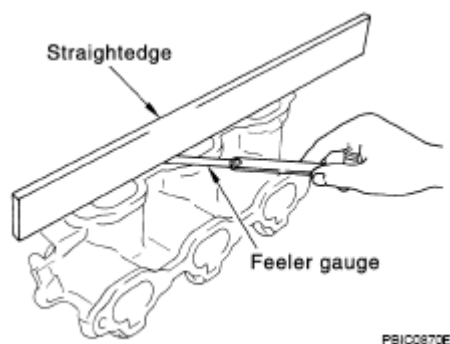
Checking Surface Distortion Of Intake Manifold Mating Surface
